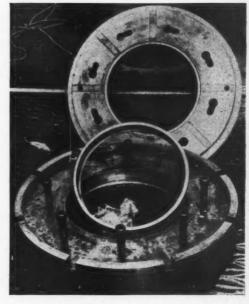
The flanged conical ring shown resting on the lower half of the mild steel die has a wall thickness of 18 s.w.g., and was explosive formed from a welded blank
